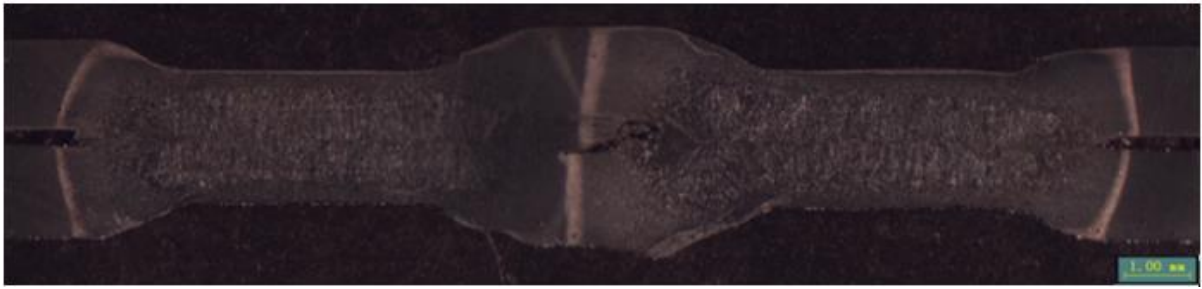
Macroscopic Cross Section of Shunted 10mm Weld
